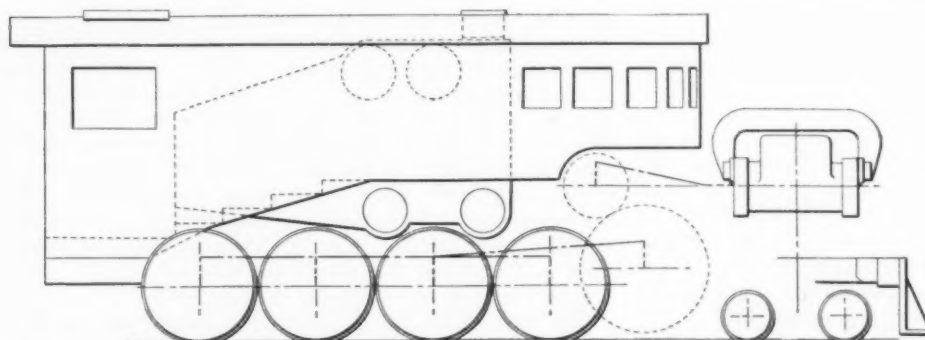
ARRANGEMENT FOR DRIVING D-H LOCOMOTIVE THROUGH REDUCTION GEARS
